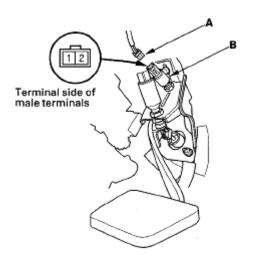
Identifying Clutch Interlock Switch 2P Connector
